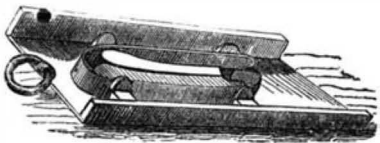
FORM FOR CUTTING THE THUMB PIECES.
